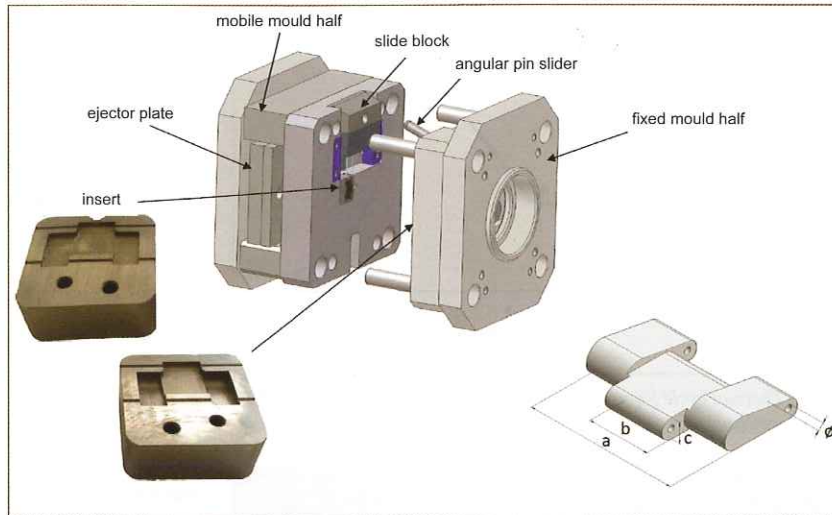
Tool set (mould frame, inserts, slide) and drawing of watch bracelet segment
